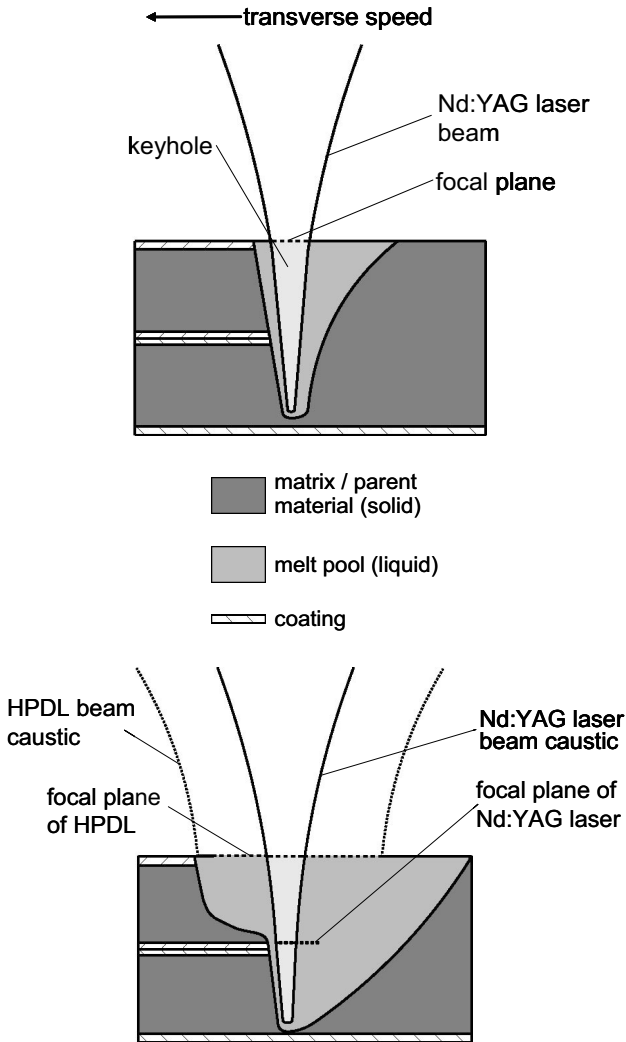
Longitudinal elevation of overlap joint for single spot Nd:YAG laser welding and BHLW to visualize the treatment of coatings and the geometry of the melt pool
